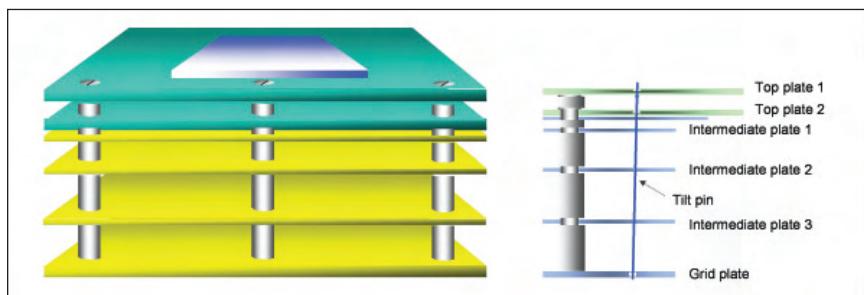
Universal grid bed-of-nails tilt pins fixture
